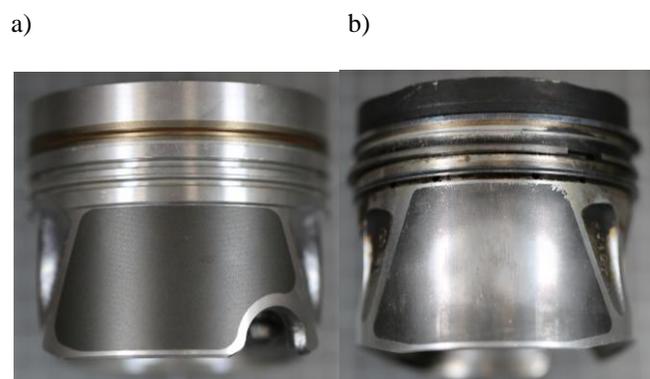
View of the piston skirts from internal combustion engines: a) unused piston, b) used piston
